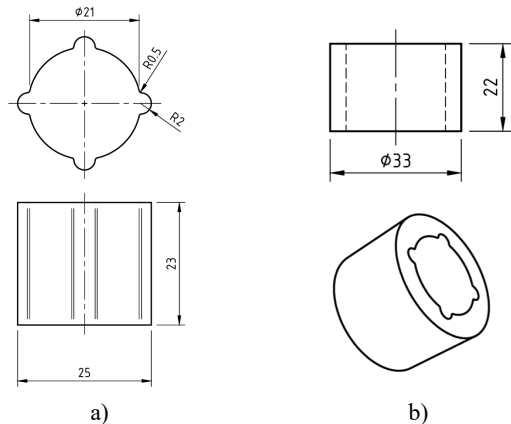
Specimen dimensions for compression testing. a) foam core, b) hybrid casting
